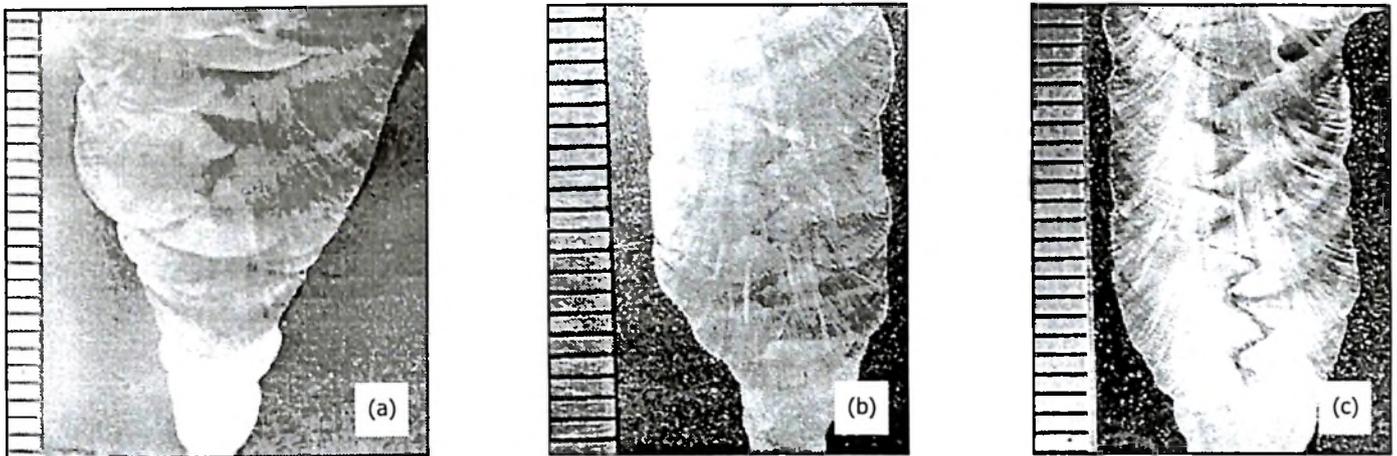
Typical Microphotograph showing (a) Conventional V-groove of 20-21mm weld width (b) Narrow U-groove with 13-14mm weld width and (c) Narrow U-groove with 11-12mm weld width.
